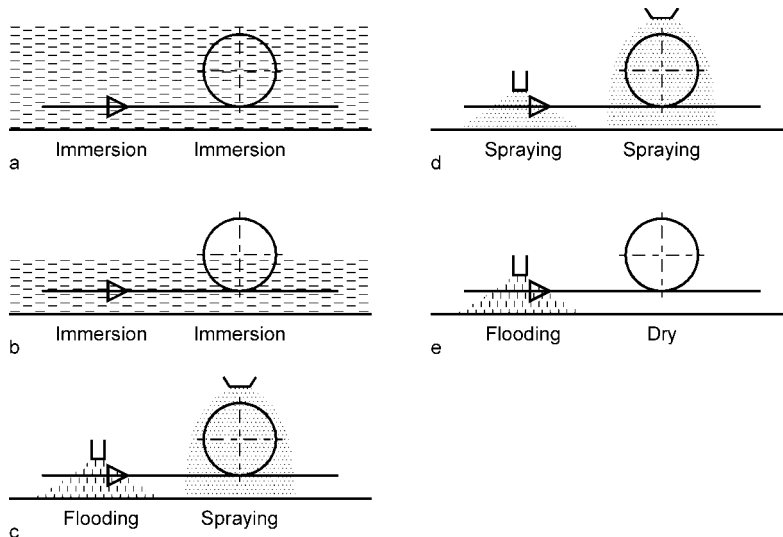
Lubrication feed in wet drawing—lubrication, cooling, and cleaning of drawing die and cone. (a) immersion—immersion, (b) immersion—immersion, (c) flooding—spraying, (d) spraying—spraying, (e) flooding—dry.
